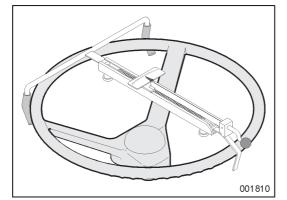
To measure steering gear mesh load in straight ahead position. Torque meter: ZF No. 7418798703
